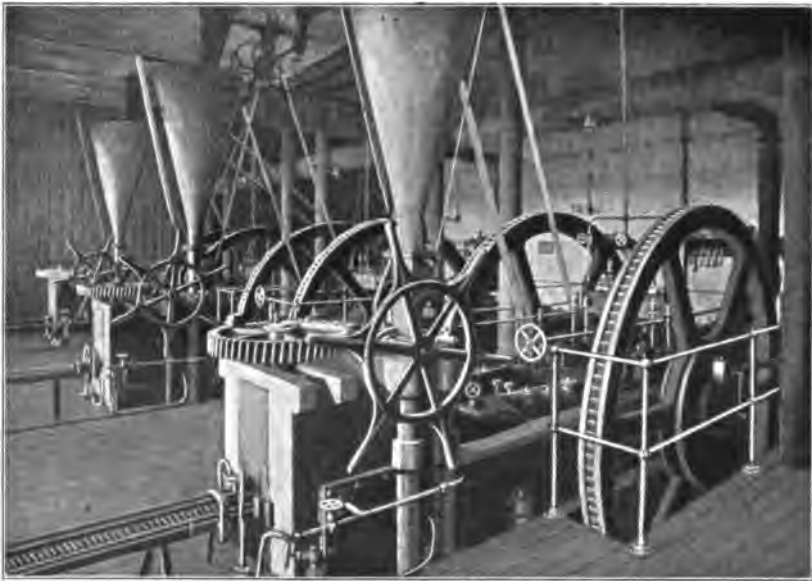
PRESSROOM OF BRIQUET FACTORY
